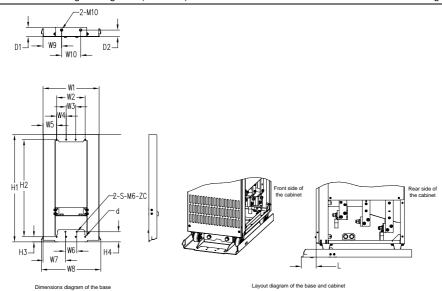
Base bracket dimensions and mounting dimensions for 380V 0200–0500 models
